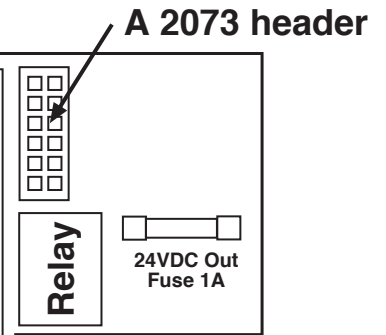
This is a view of the Mixer PCB (front board) as you would view it inside the amplifier.
